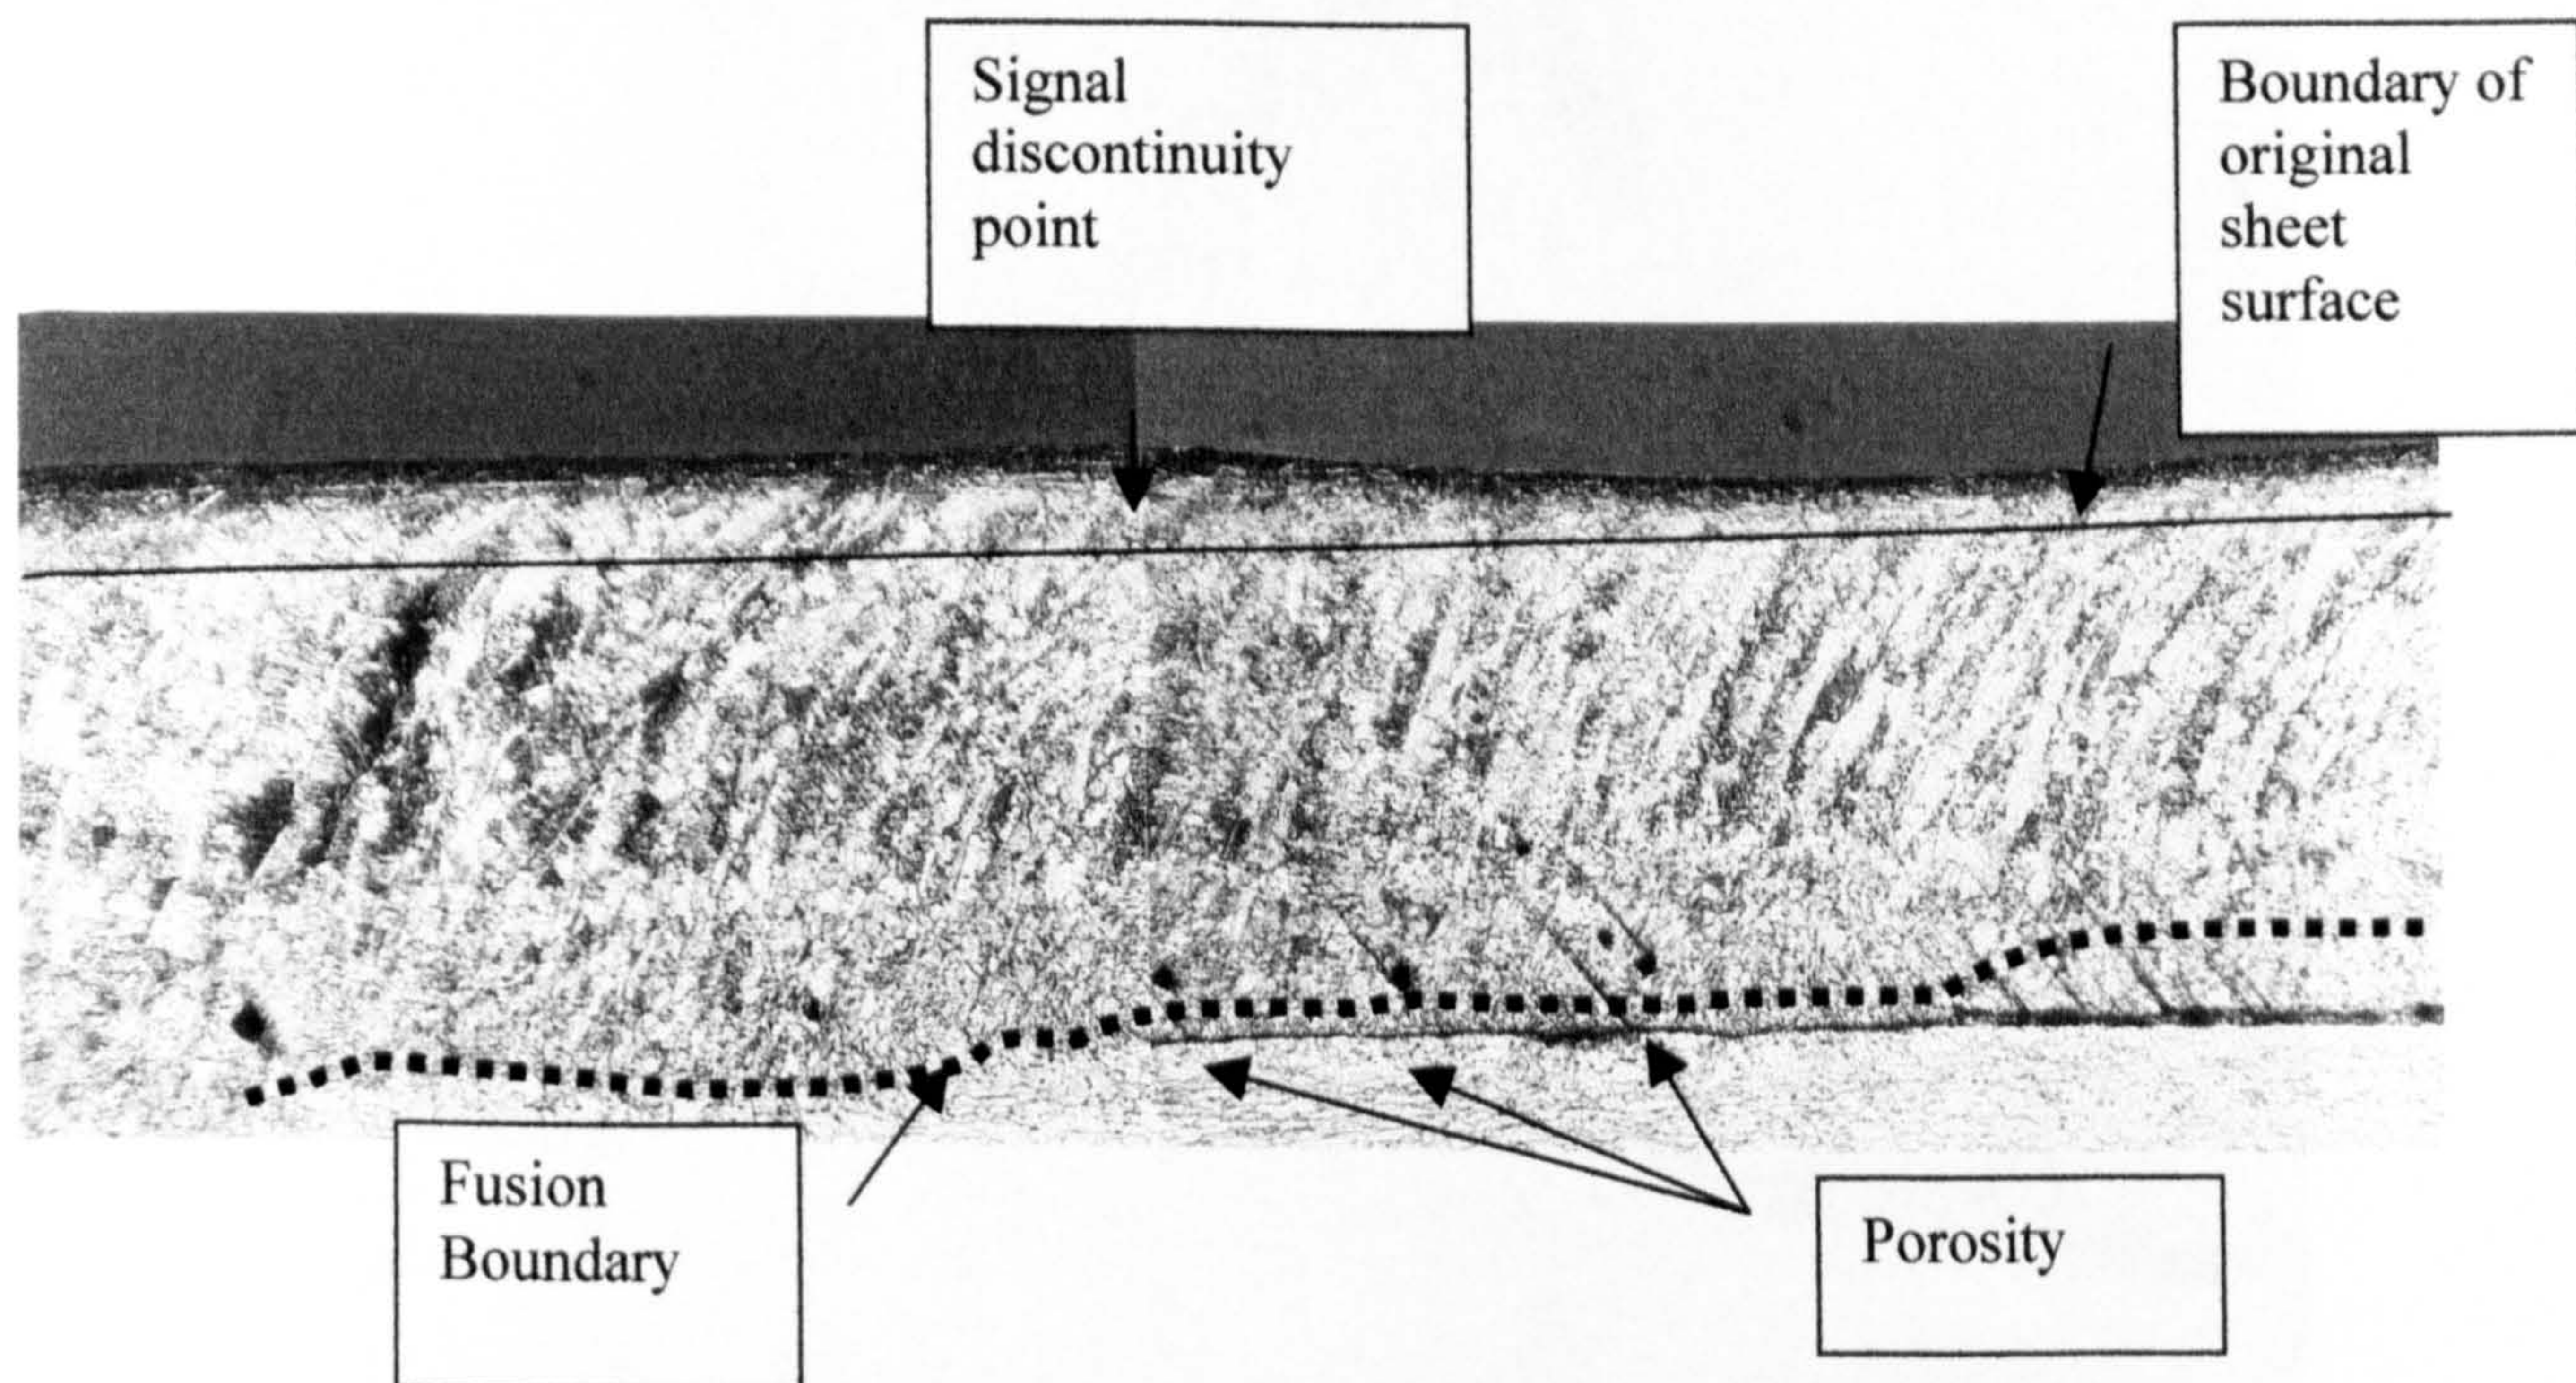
Longitudinal weld section (mag 50x) taken through the centre-line of a weld made in two overlapping sheets of 1.0 mm steel showing the weld discontinuity point towards the end of the weld. Etched in 2% Nital. Fusion boundary profile has been highlighted for clarity
